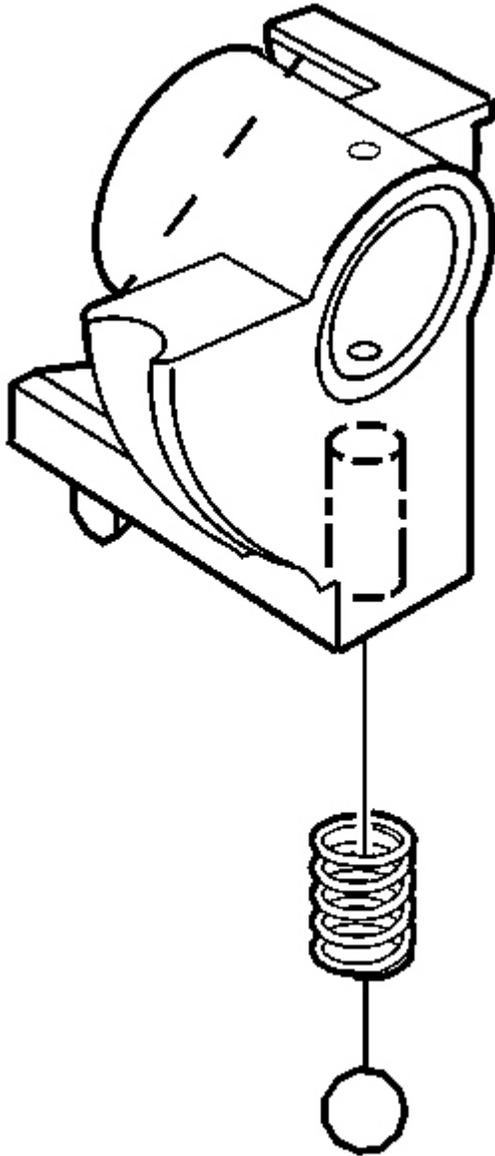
Identifying Ball Detent & Spring In Front Offset Lever
